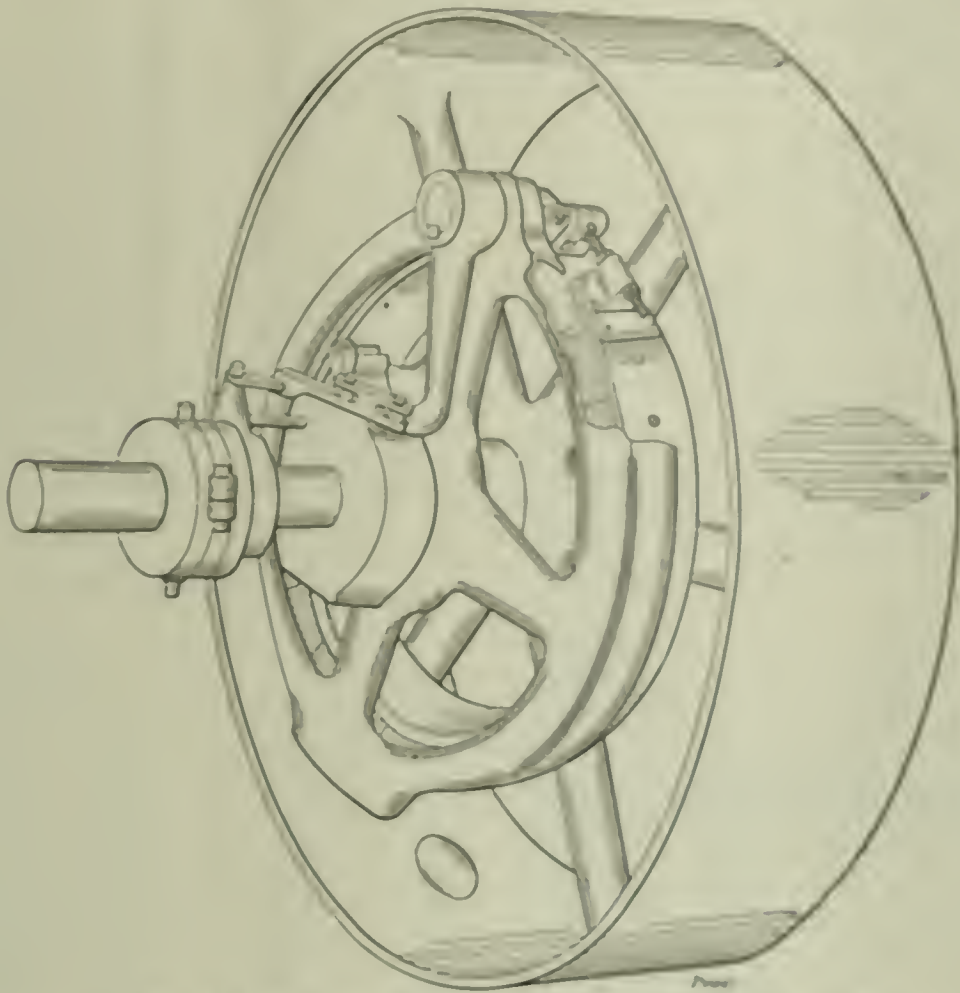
CALDWELL CLUTCH ATTACHED TO PULLEY
